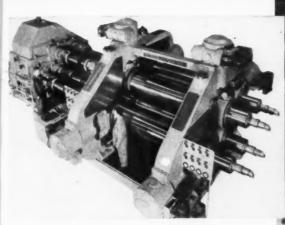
Views of a Four Roll Z-type Calender, showing separate Pinion Stand Drive, Main and Pullback Bearings, and Lubrication Lines.
